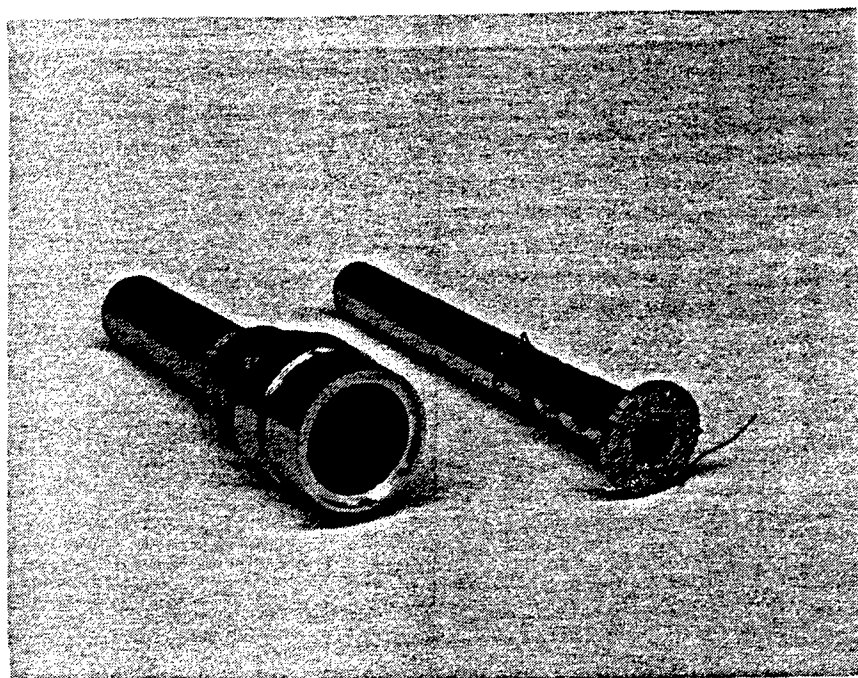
Rear views of tungsten button/heat choke subassembly (left) and guarded electrode subassembly (right).
